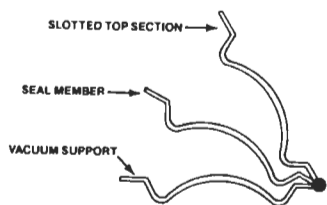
F(A). Cross section of disk assembly for Figure 7-8F. By permission, Fike Metal Products Div., Fike Corporation, Blue Springs, Mo.
